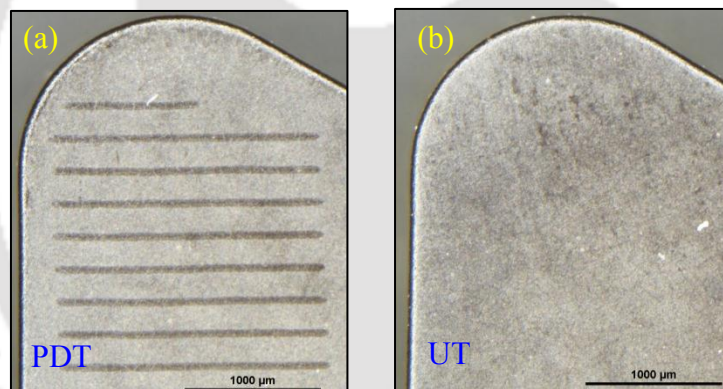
Rake surface of mechanical micro-textured cutting tools: (a) perpendicular textured tool and (b) untextured tool
